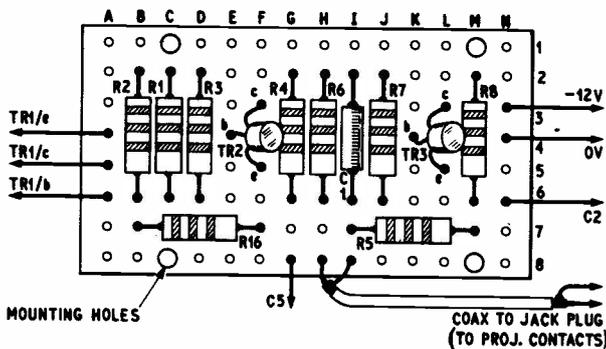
Component layout and underside wiring of Board 1 (Schmitt trigger) later fitted in the synchroniser box
